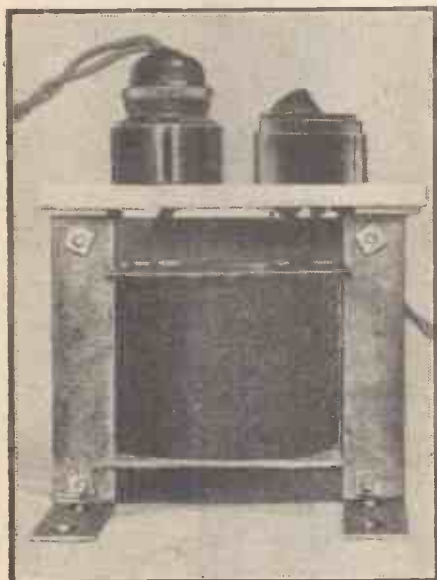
Method of assembling the transformer stampings in alternate layers.
